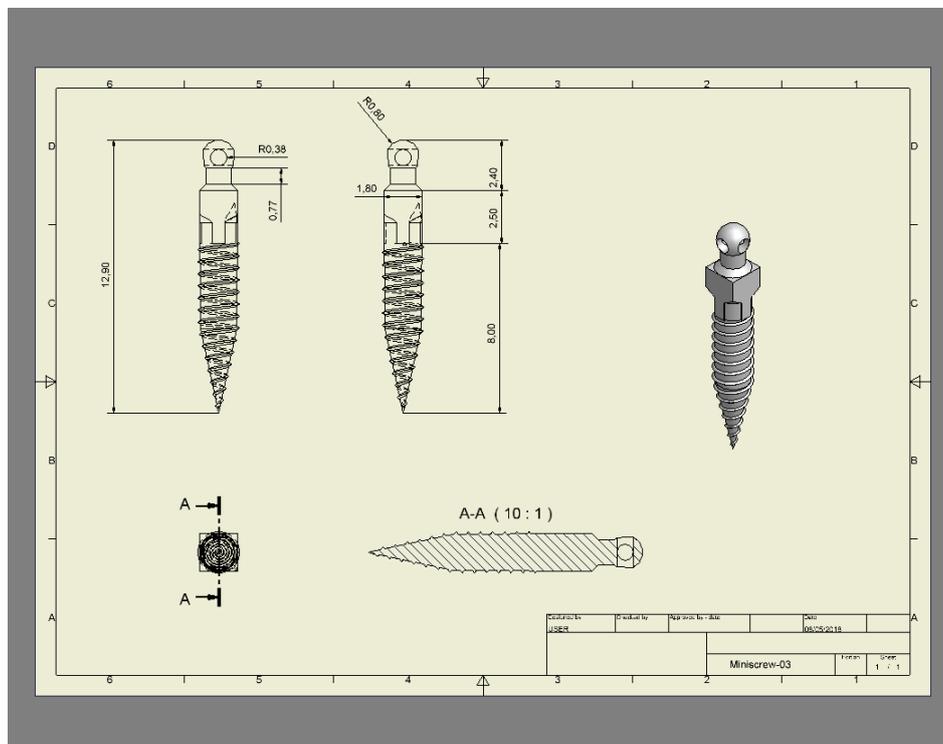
Miniscrew design on Autodesk Inventor screen based on manufacturer dimensions.
